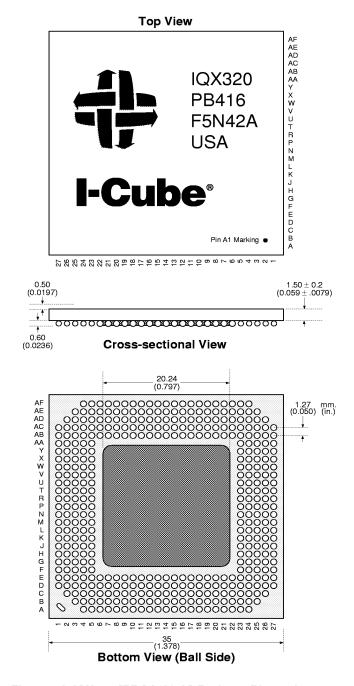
IQX320 [PBGA/416L] Package Dimensions
